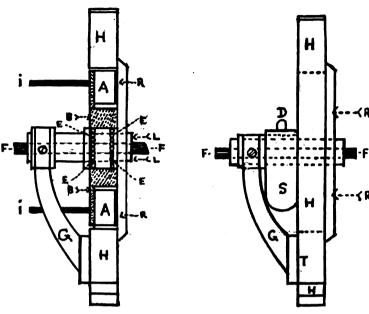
SECTIONAL DIAGRAM FIG. 4.—SELF OILING BEARINGS, INNER SUP-OF REGULATOR. PORT AND BACK PLATE OF REGULATOR.
